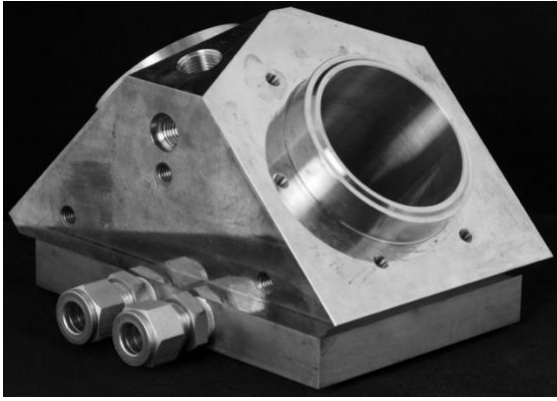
Prototype 90° miter bend with a 63.5 mm ID.
